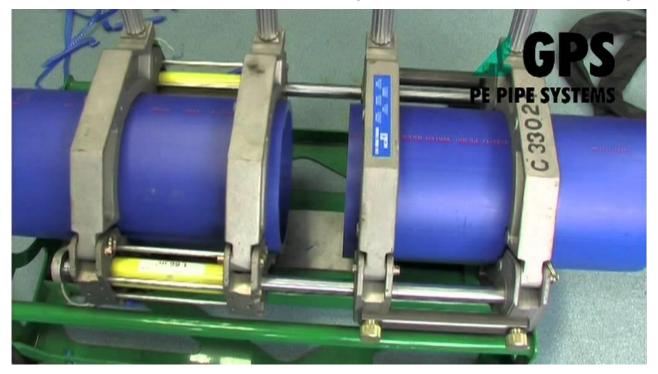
Aligning the HDPE pipe for welding
